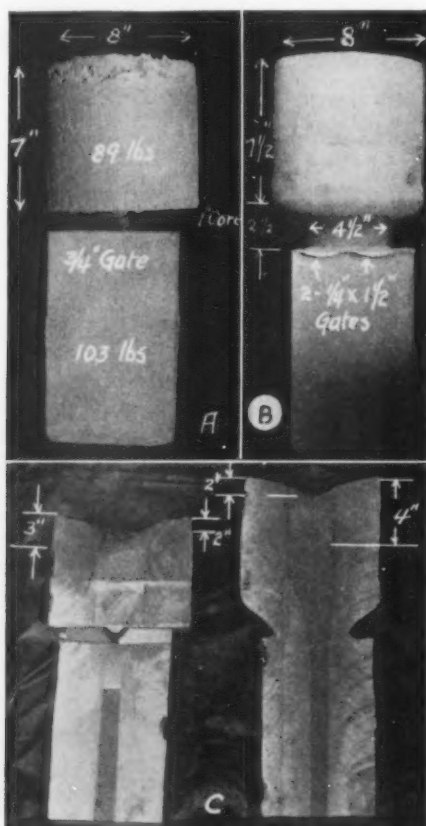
(A) CASTING POURED THROUGH RISER WITH $\frac{3}{4}$ -IN. VERTICAL GATE. (B) SAME CASTING POURED THROUGH RISER USING TWO HORIZONTAL GATES. (C) INTERNAL SECTIONS OF CASTINGS (A) AND (B).
